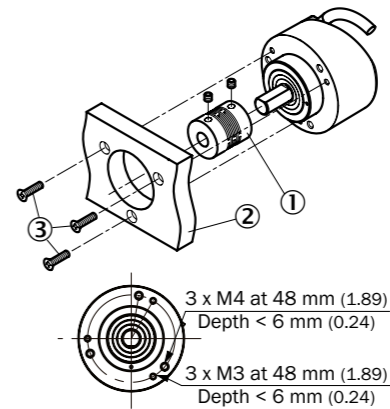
Mounting of DBS60 Core servo flange via flange-side threaded holes
